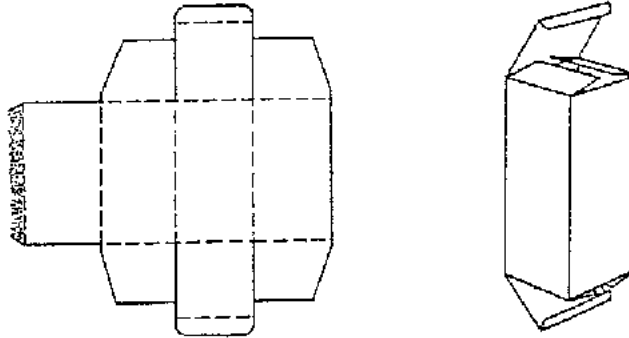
Pre-cut board (Courtesy of PRODEC)
